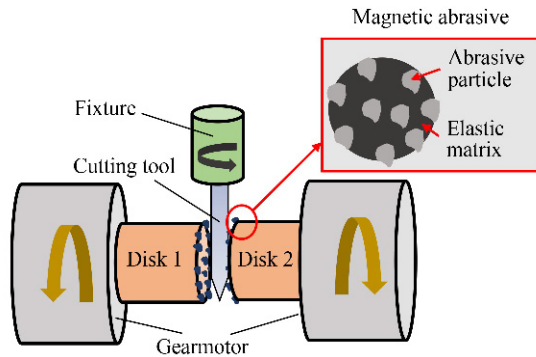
Double-disk magnetic machining to prepare the cutting edge.
